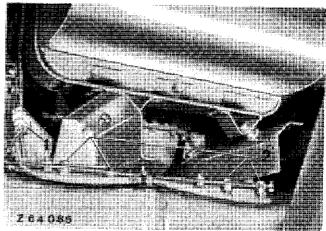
Removing Engine Connections on Radiator Side (Combine 935)
